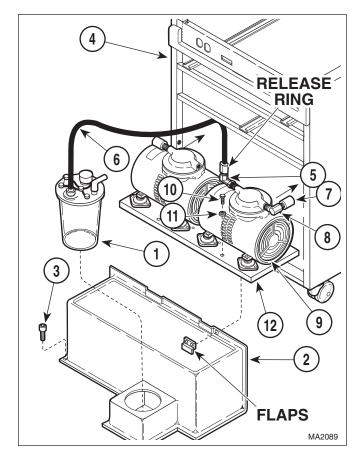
Disconnecting / Connecting Vacuum Pump Assembly
